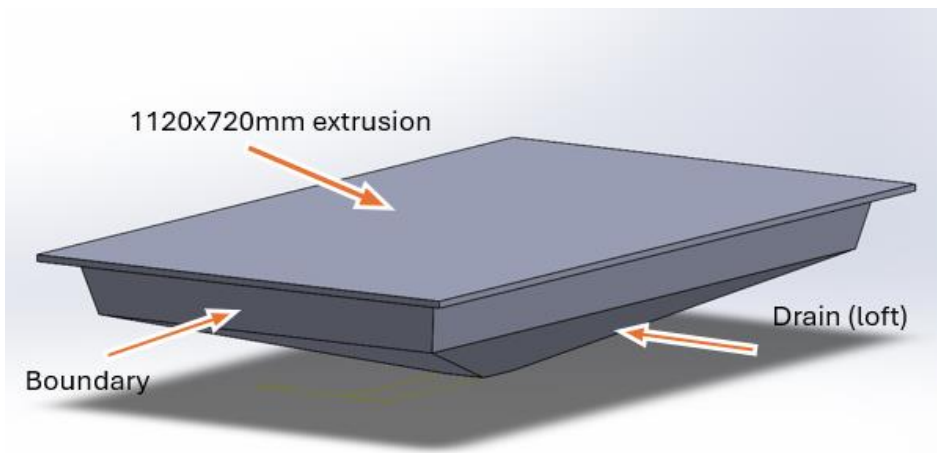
Completed solid geometry with added 1120x720 mm extrusion on top.
